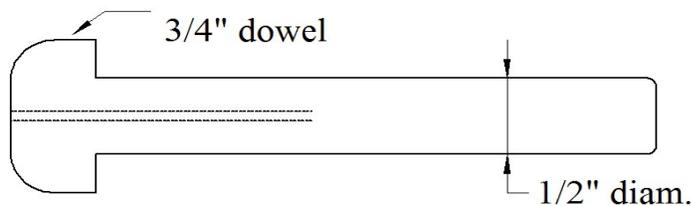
3/4" dowel turned on a lathe to provide a 3/4" diameter top and a 1/2" shaft. For the needle core, the hole is 1/16th", for the square rod it should be 1/8" and for the flat core, parallel holes of 1/8" diam. The cores should project perhaps two inches above
